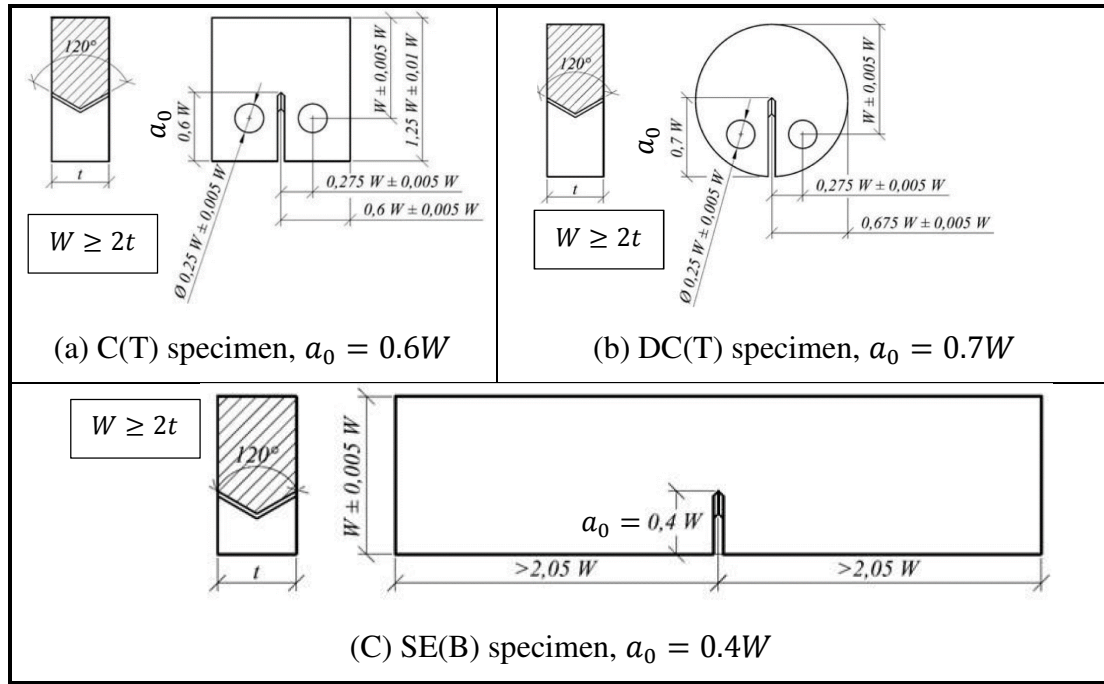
Most popular specimen shapes for fracture mechanics tests; The values of a_0 (the distance from physical crack front to the specimen's edge) are given for each specimen type; reproduced from (Trafikverket 2014a).
